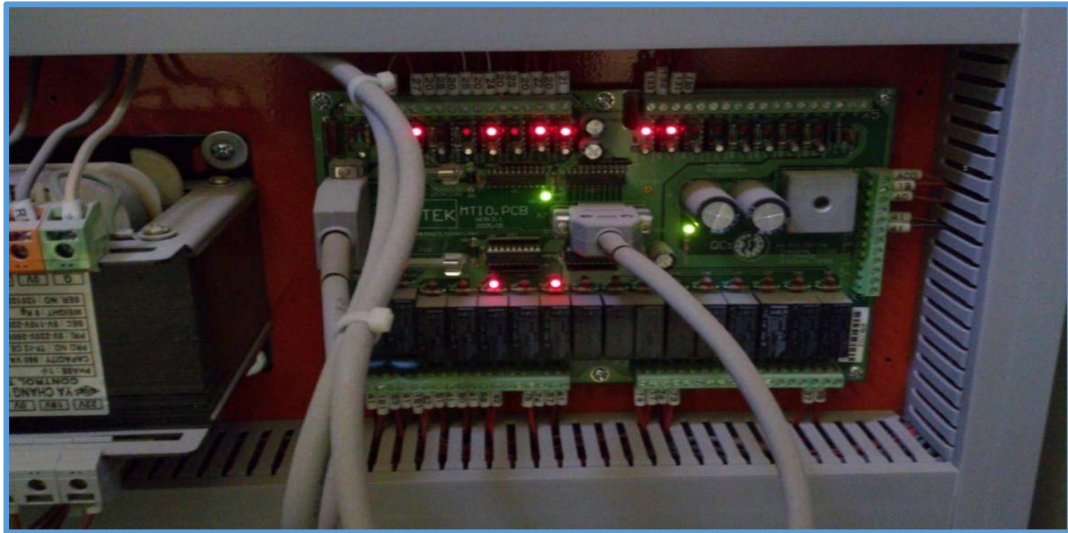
Serial port (RS-232) of C-TEK Milling machine.
